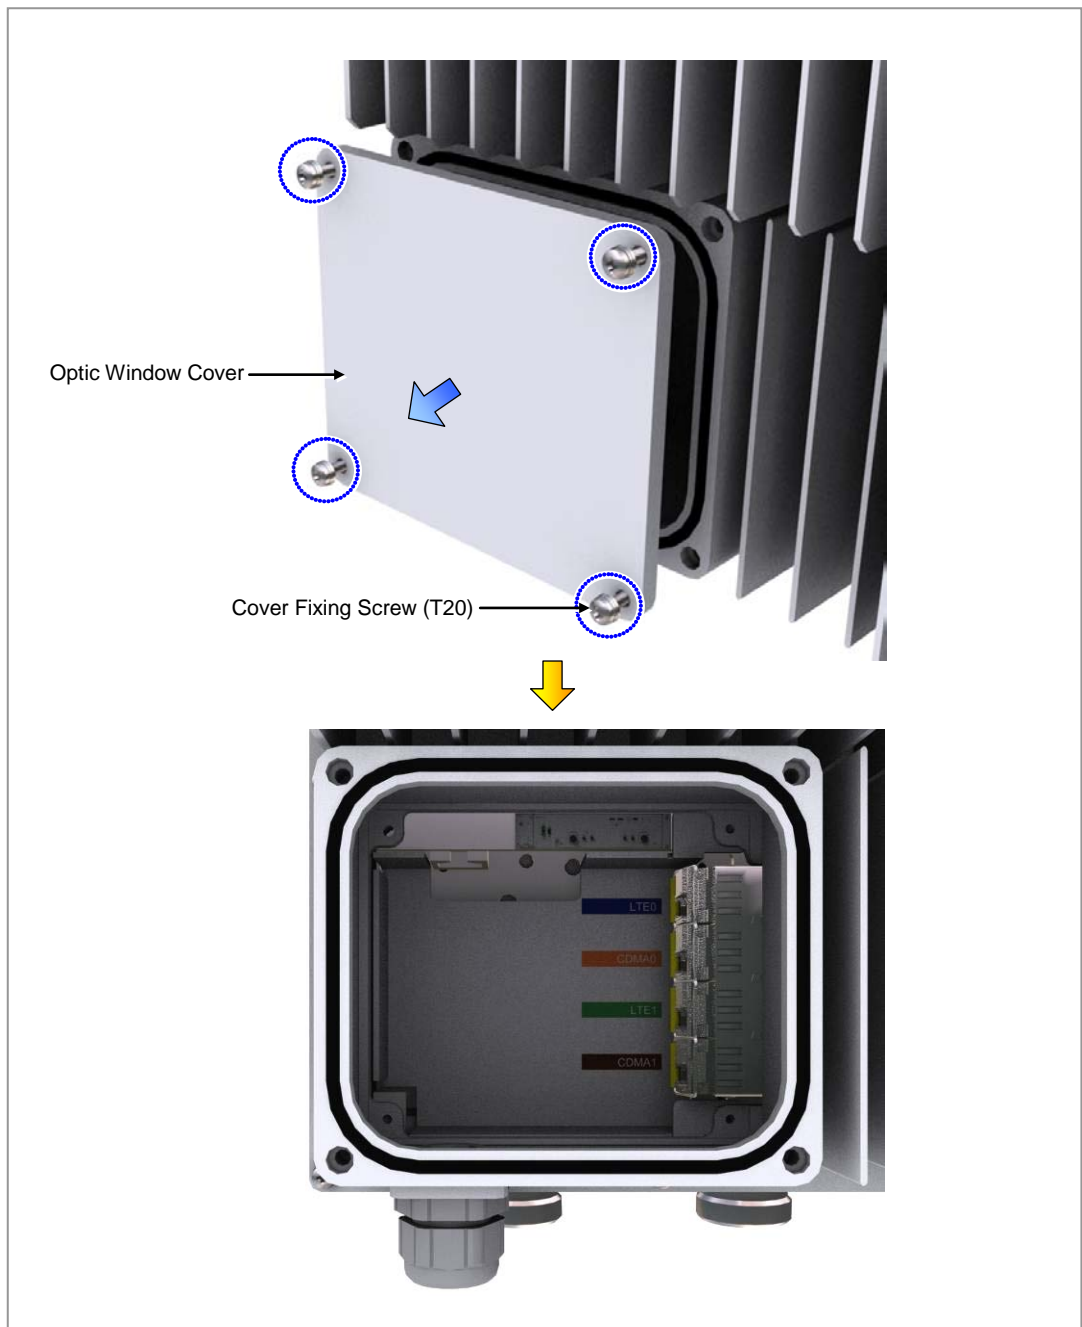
Connecting RRH-P4 CPRI cable (1)
